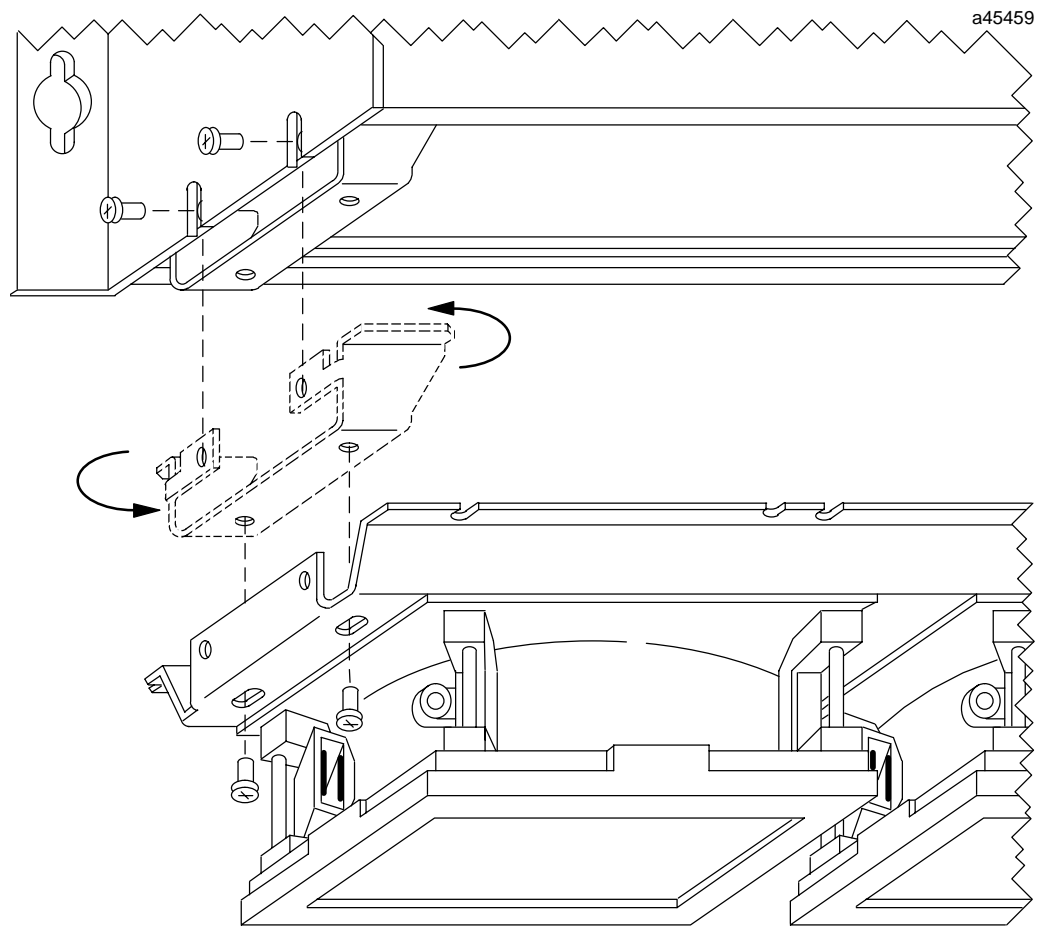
Mounting Details for Fan Assembly and Optional Mounting Bracket
